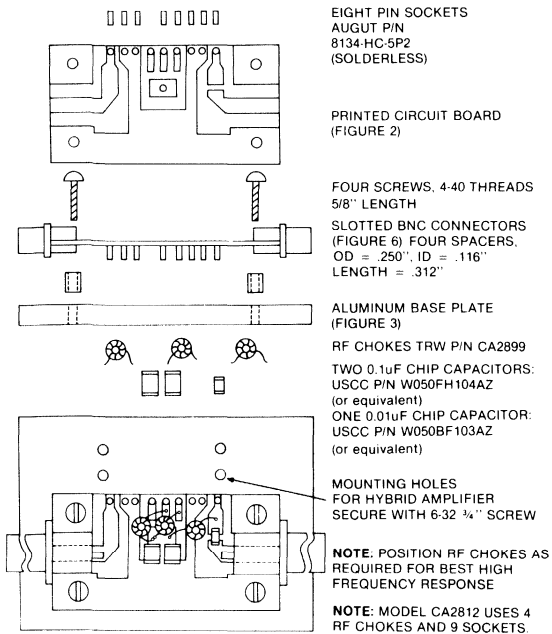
CA2820 AND CA2812 TEST FIXTURE ASSEMBLY
